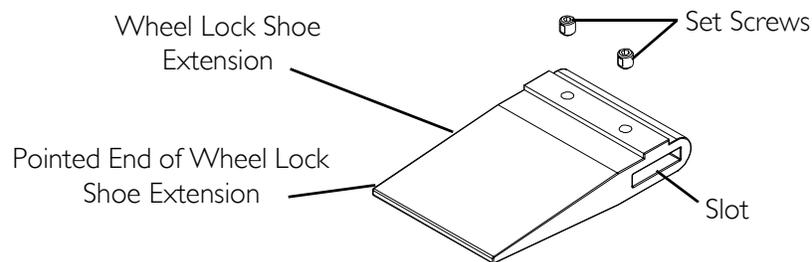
Installing Wheel Lock Shoe Extensions
